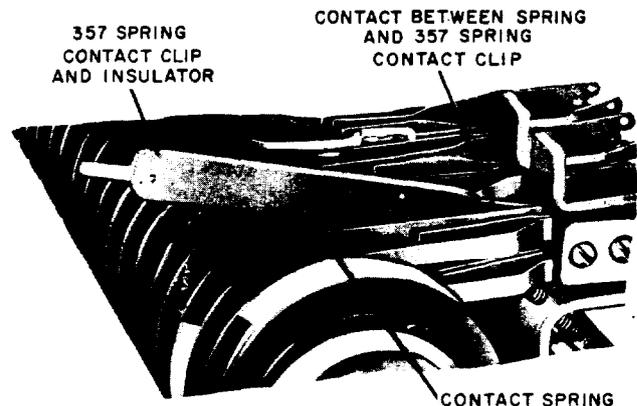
Method of Using the 357-Contact Clip and Insulator for Sequence Switches
